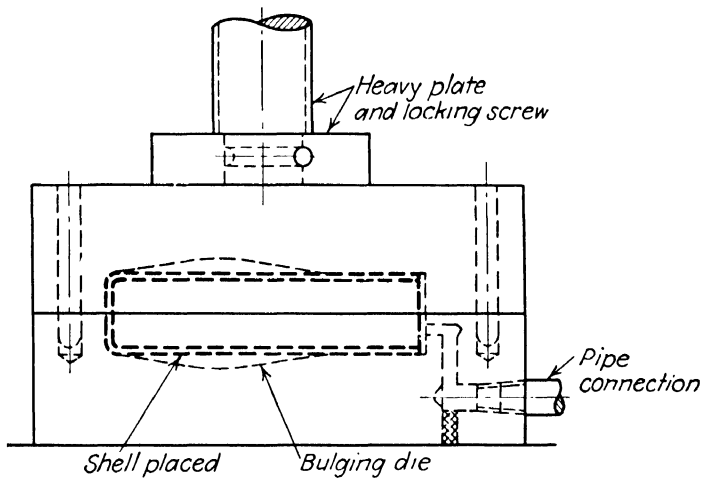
A horizontal die and its bulging blocks which can be used on a bench in connection with a fluid-pressure pipe.
